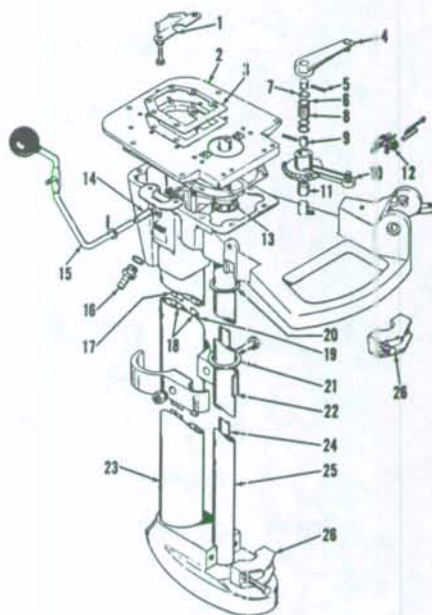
Exploded view of lower motor leg and associated parts used on OX 140.
